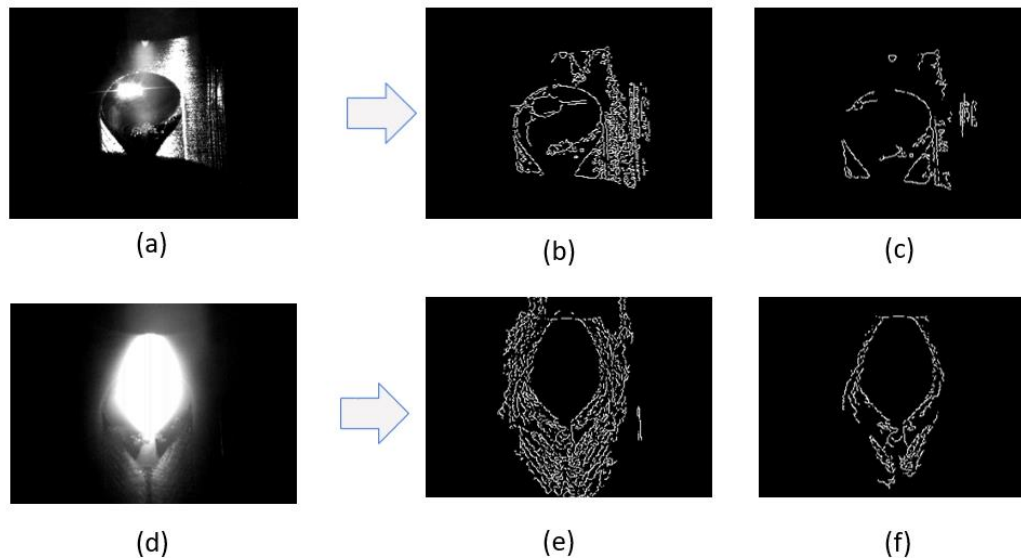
Passive vision weld pool image. (a) Image captured with 10  $\mu\text{s}$  exposure time; (b) under exposed weld pool image; (c) right exposed weld pool image; (d) over exposed weld pool image
